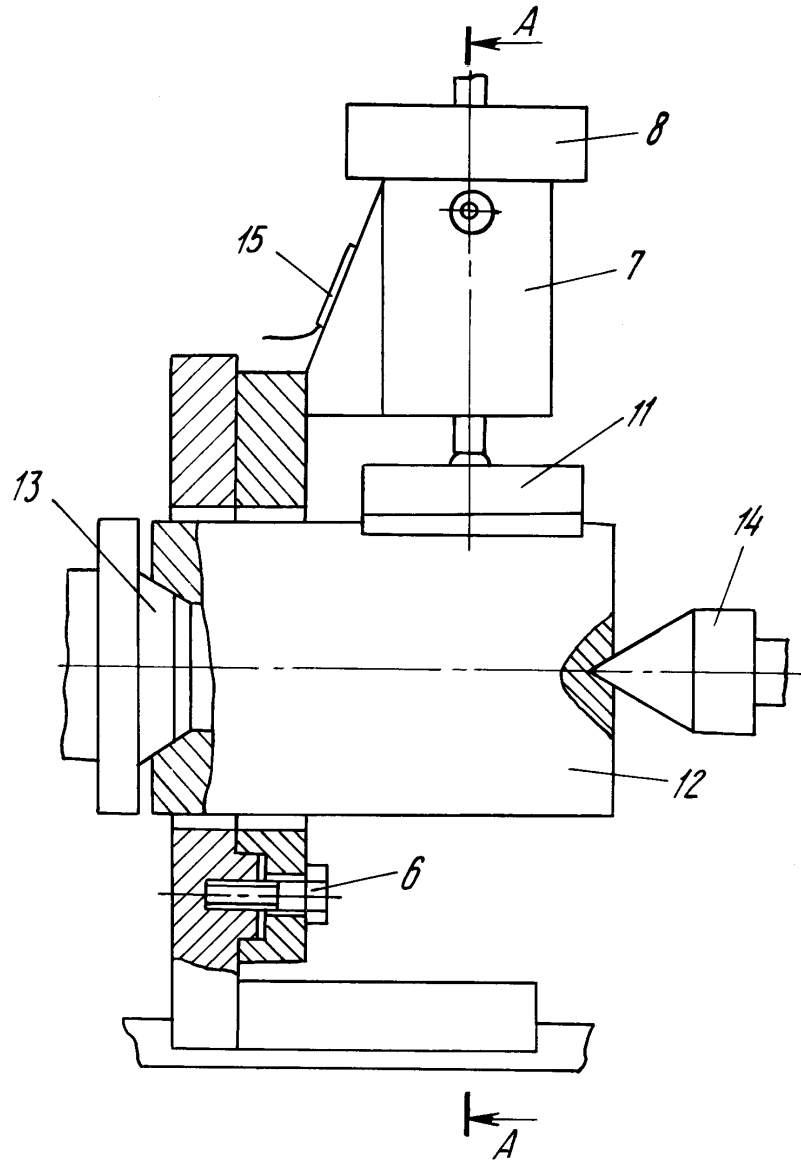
A device for determining the radial dynamic stiffness of spindle knots of metal cutting machines. View A.
